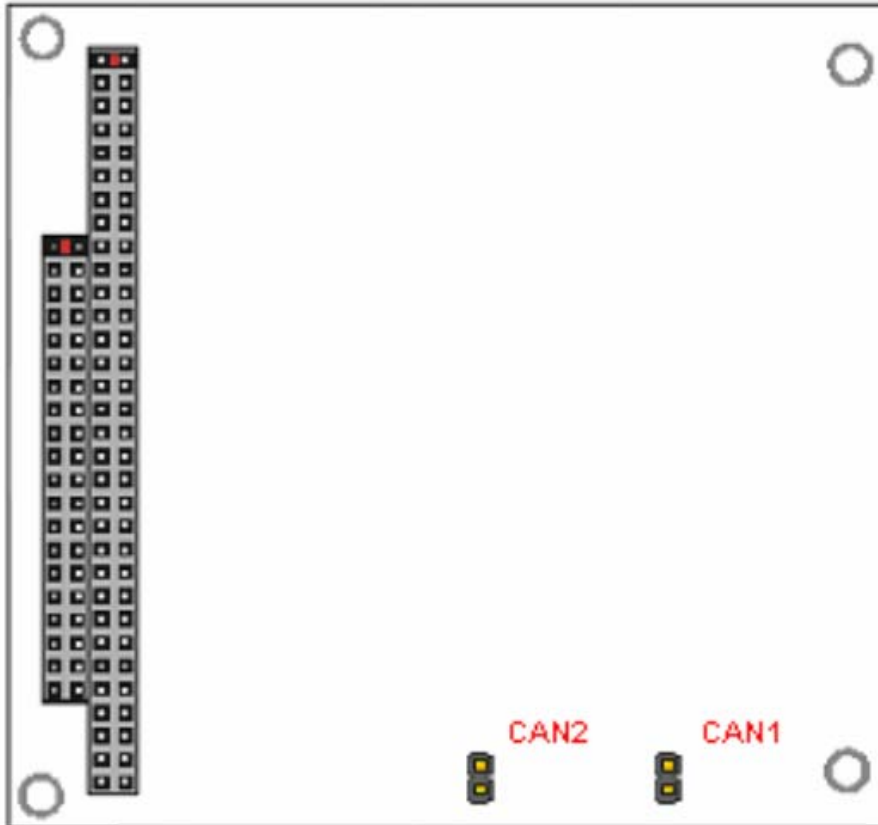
Jumpers and solder jumpers on the COM-1273 board
